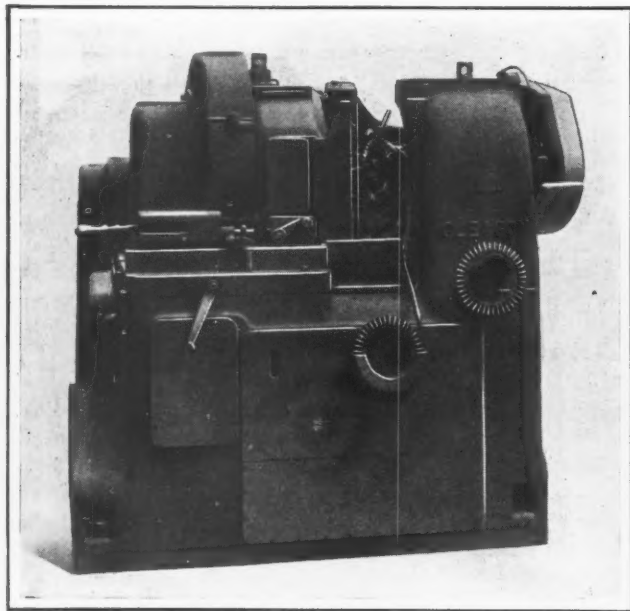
Gleason Single-purpose Straight Bevel Gear Generator
